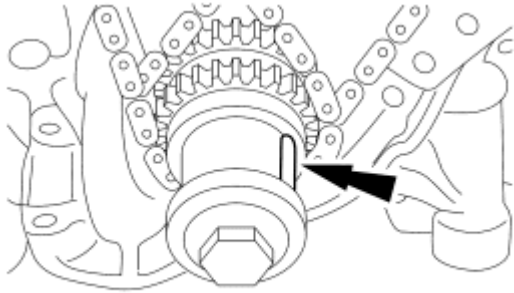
Identifying Crankshaft Keyway In 11 O'Clock Position
